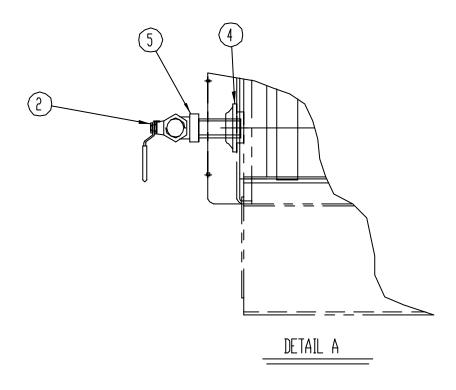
SAMPLING VALVE, FRONT HEAD
